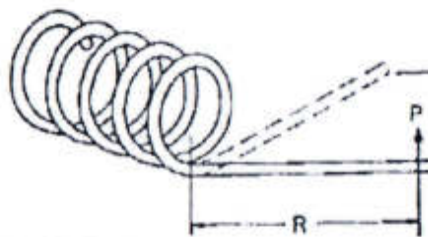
Typical way of loading helical torsion spring stress will be flexural against helical tension compression spring in which main stress will be shear. Typical way of loading helical torsion spring is shown in Fig. 2
